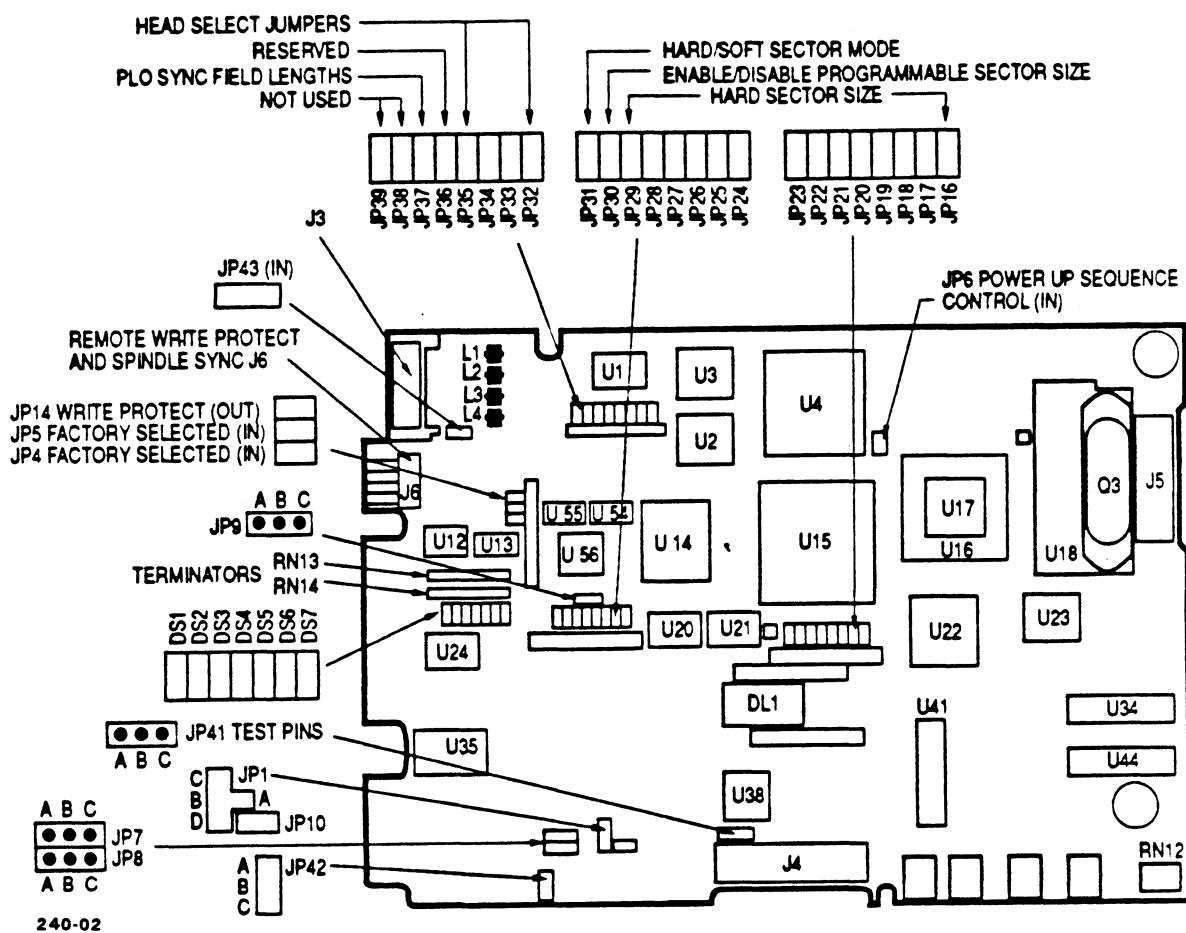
MAXTOR PCBA #1014520, FAB #9
